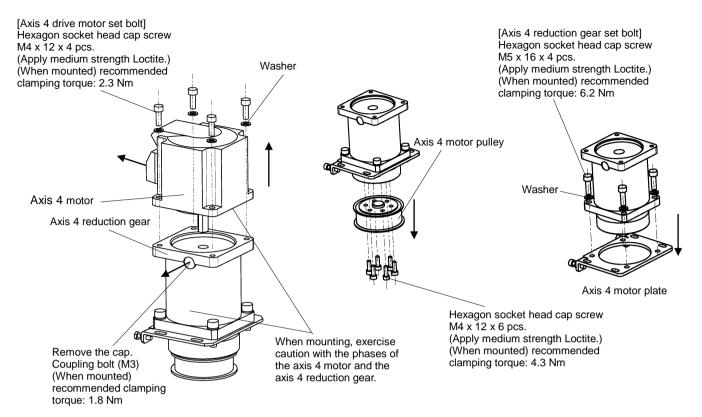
Replacing axis 4 reduction gear (KHL-300, KHL-400)
